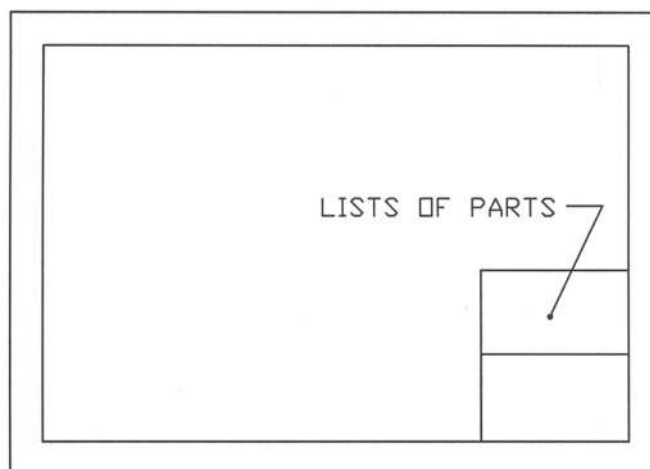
Layout of a Drawing Sheet Showing Location of List of Parts
